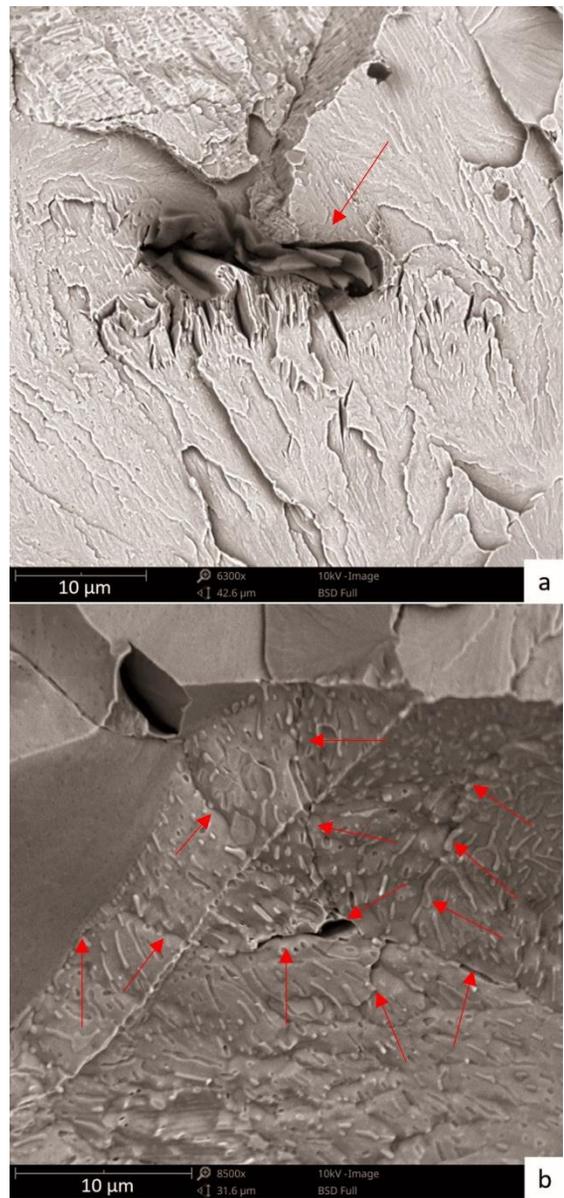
Furled a) and unfurled b) bifilms on the fracture surface of a ductile iron sample
